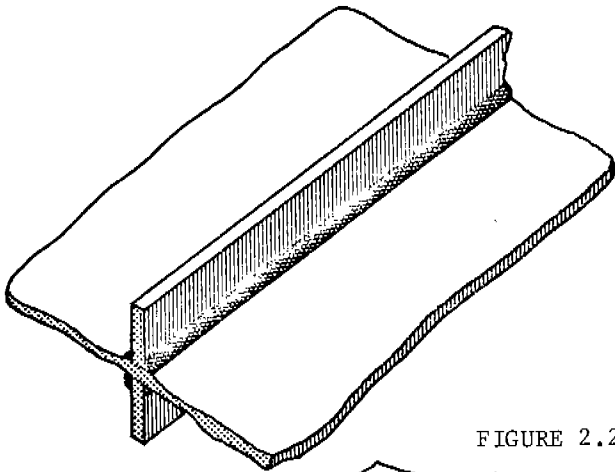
STIFFENER TYPE CRACK ARRESTERS
